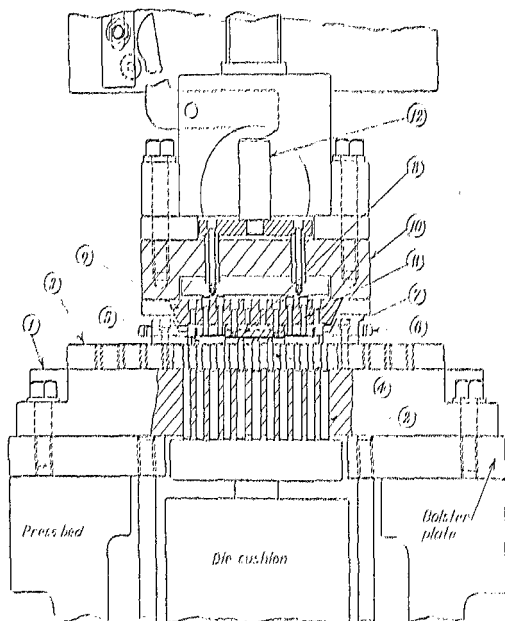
Cross-section view of assembly of punch-press holder with plate-type punch and die in blanking position. (General Electric Co.)
